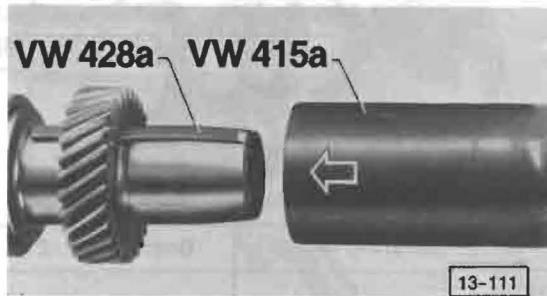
Distributor drive gear/crankshaft timing gear, installing
